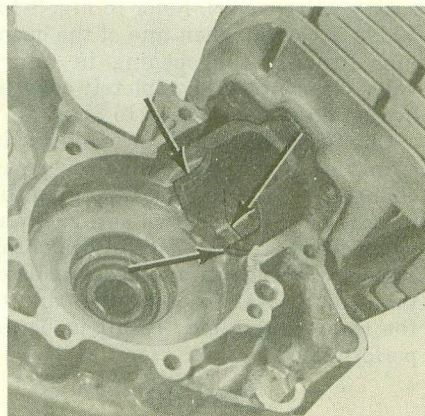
The cylinder should match with crankcase openings. Arrows indicate locations of possible misalignment.
